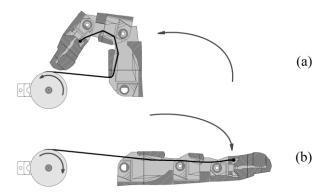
Cutaway view of finger actuation mechanism showing (a) flexion by winding up on the servo spool and (b) extension by releasing the spool allowing torsion springs at each joint to extend the finger.
